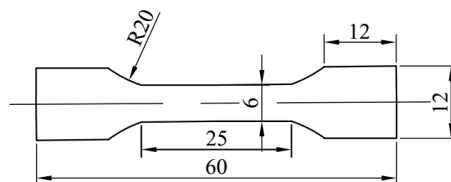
Shape and dimensions of the specimens for tensile tests (mm).
